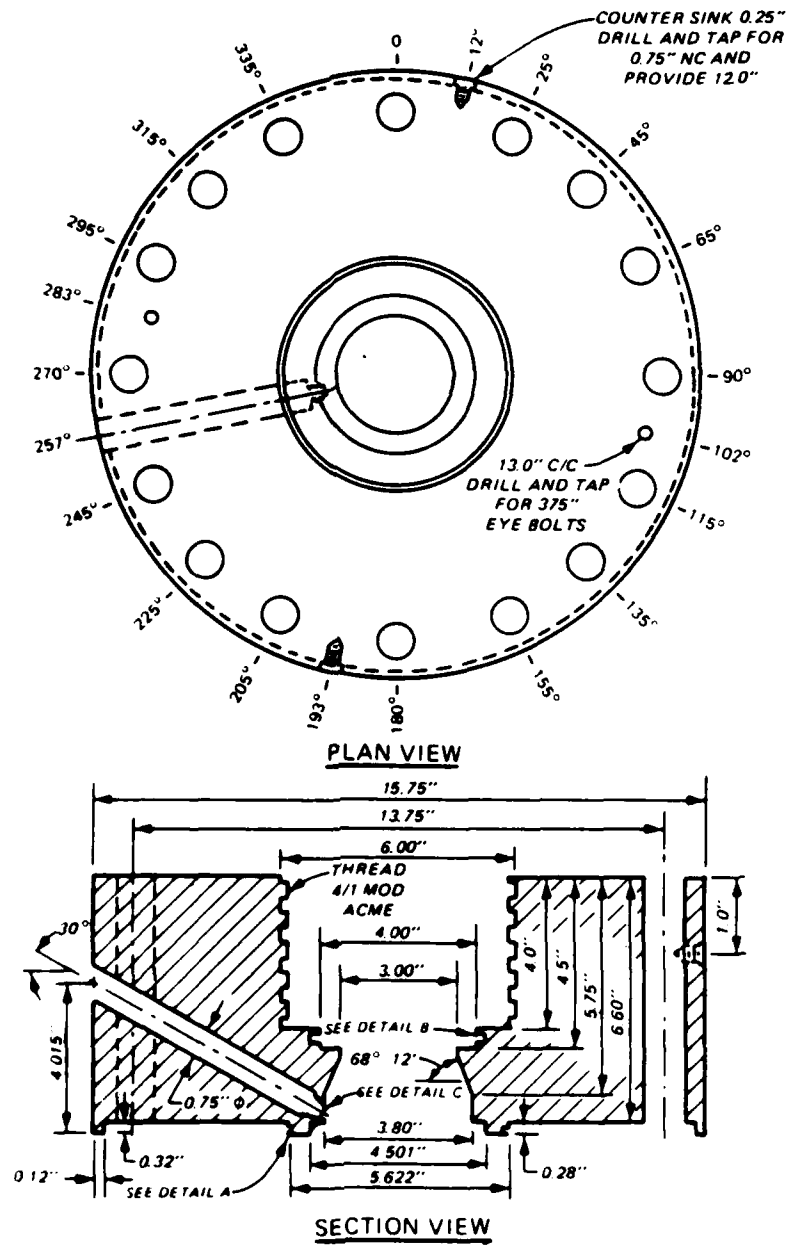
Drawing of the upper assembly of the WES 0.1-msec device.
